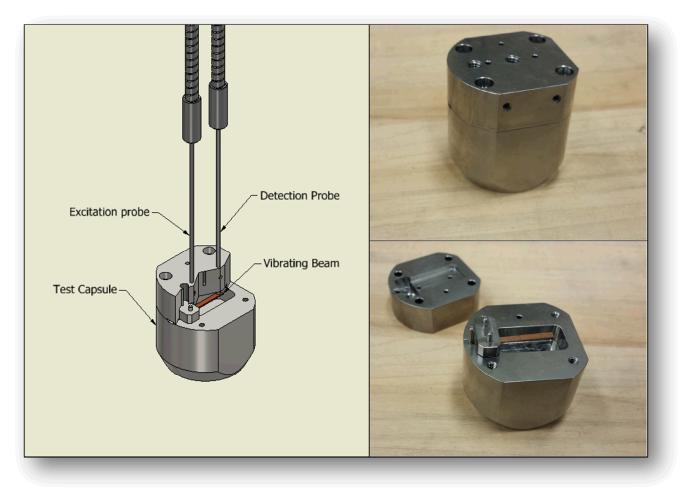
Cut-a-way view of the test capsule (left) and photographs of the fabricated test capsule (right).
